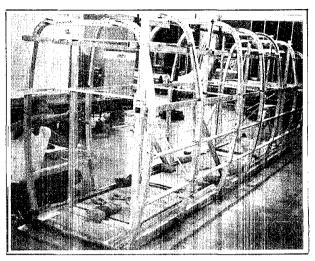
Assembly of Superstructure Frame Using Fixture
